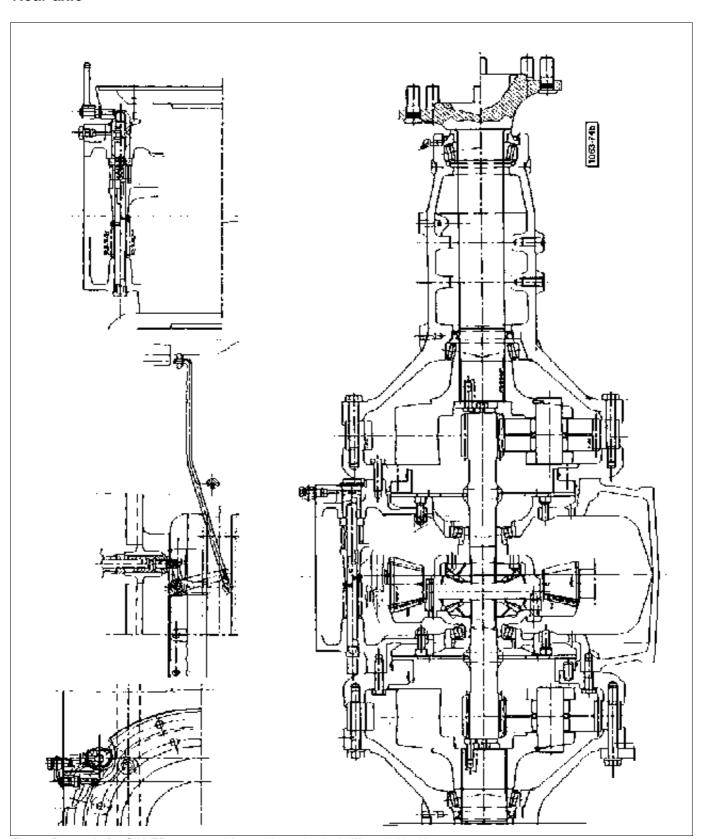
Rear axle for SILVER 100.6 machines with mechanical differential locking.
